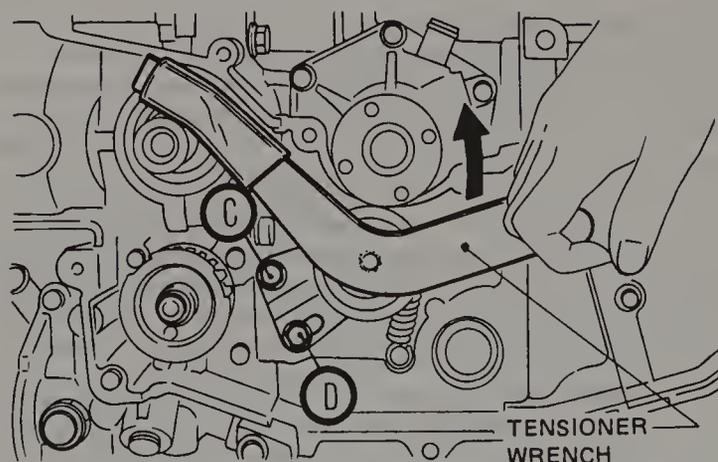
Pull up on the tensioner wrench to position the tensioner, then tighten bolt "c" (Sec 5)
